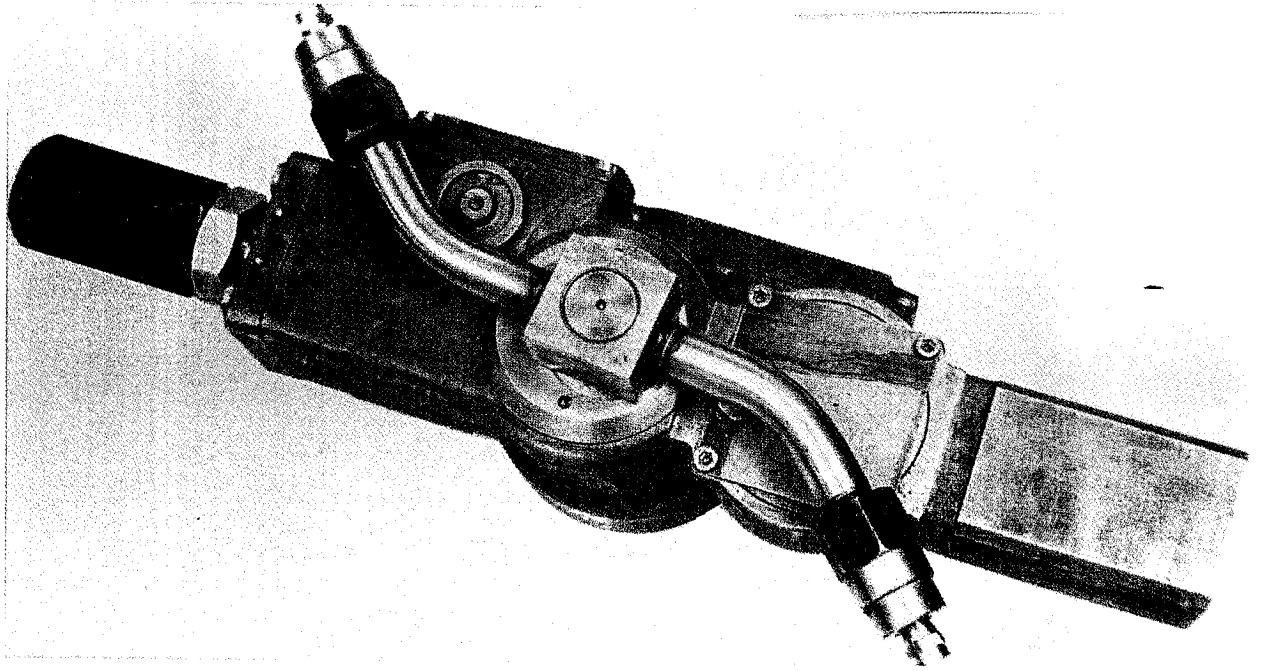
TWO AXIS ROTARY NOZZLE HEAD
